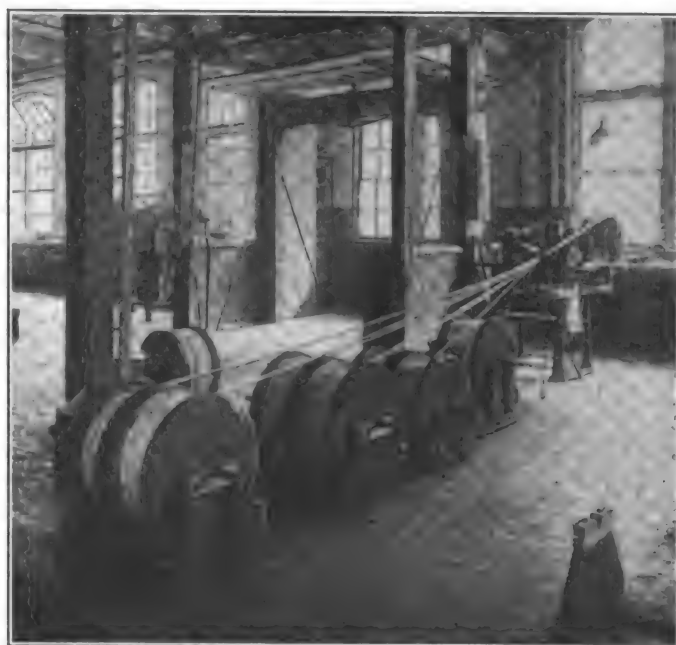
WINDING MACHINE IN ELECTRICAL DEPARTMENT.
